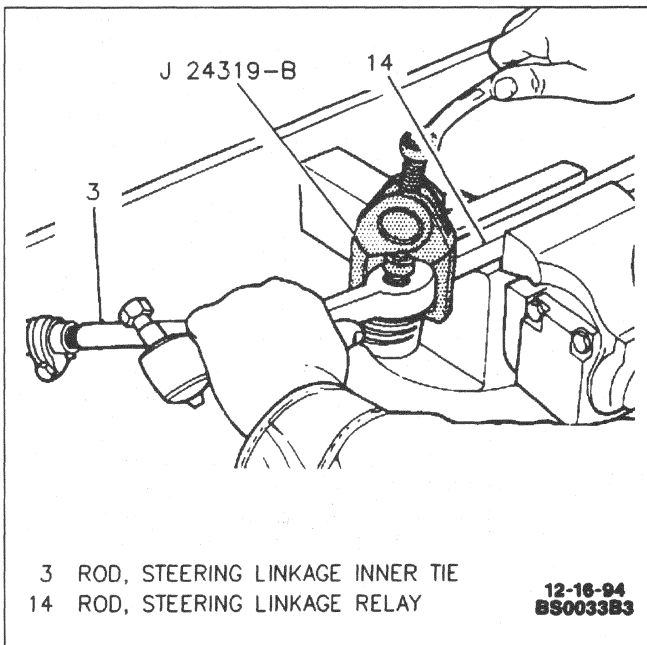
Separating Steering Linkage Inner Tie Rod at Steering Linkage Relay Rod
